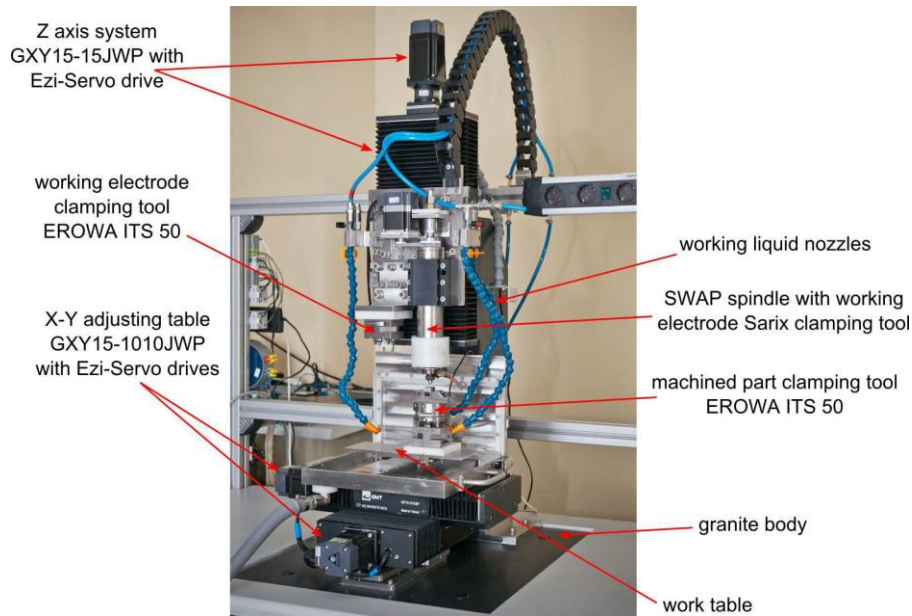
Photo of the machine prototype for EC/ED micro-machining [13]
